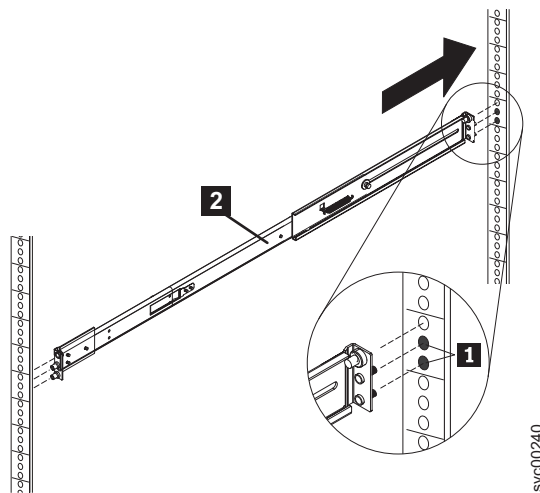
Inserting the right slide rail into the rear rack mounting flange
